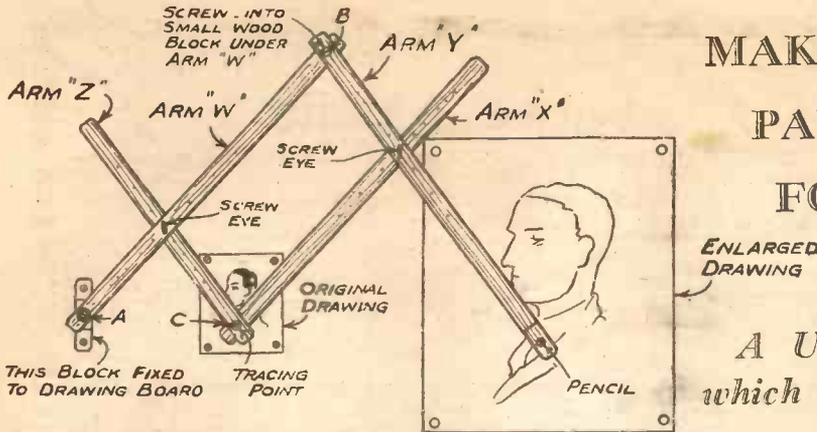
The pantagraph completed. The assembling of the parts is shown in this diagram.
